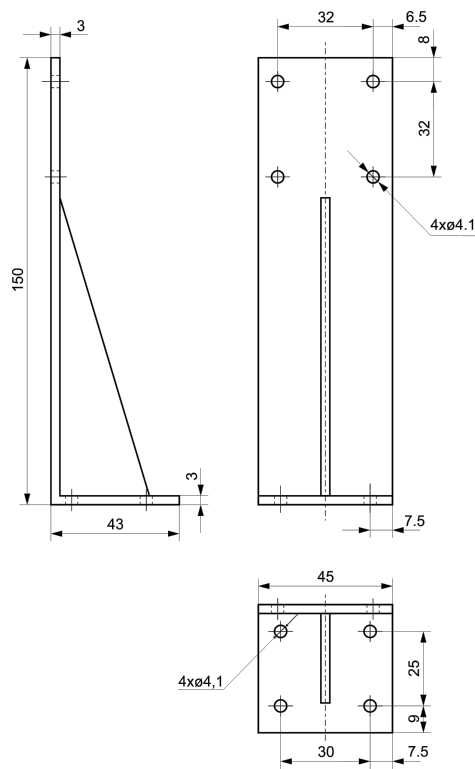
The drawing of the frame. The material is oxygen-free copper.
